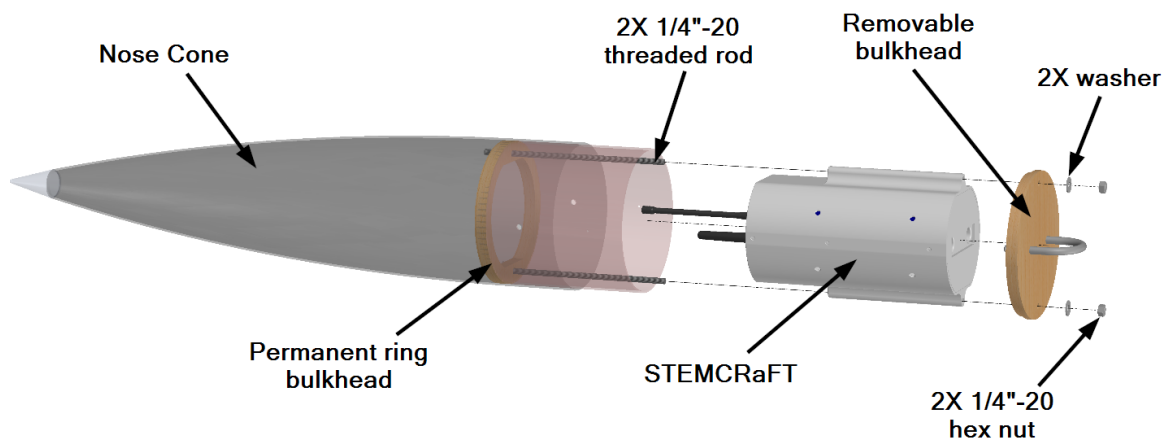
Exploded view of STEMCRaFT and Nose Cone.
